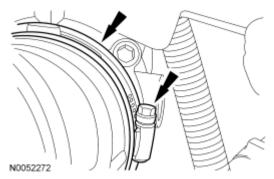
Locating Air Cleaner Assembly Bracket Bolt Courtesy of FORD MOTOR CO.
